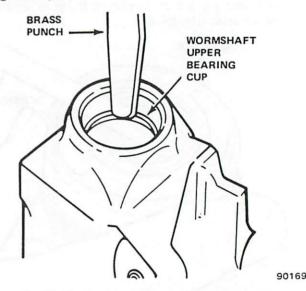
K-13 Removing Wormshaft Upper Bearing Cup
